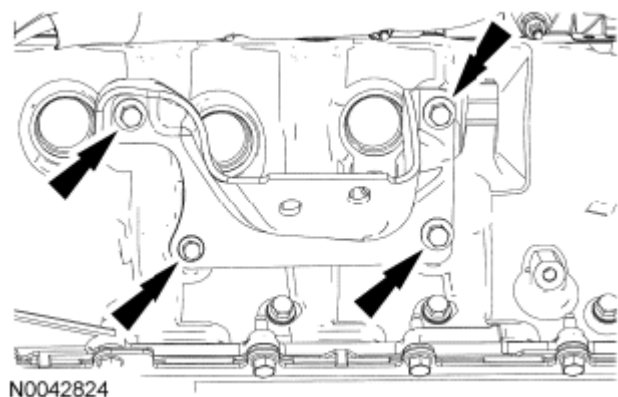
Locating RH Engine Support Insulator Bracket And Bolts
